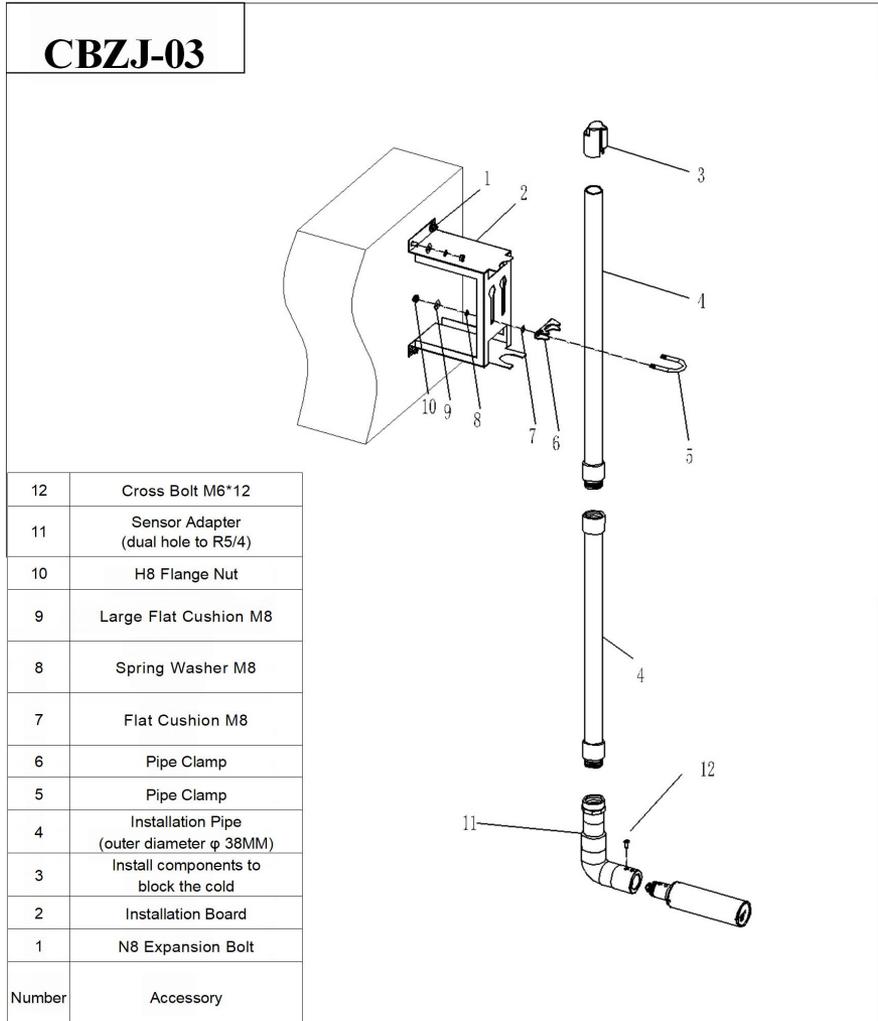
Quick Dismantling Pool Edge Installation Diagram
